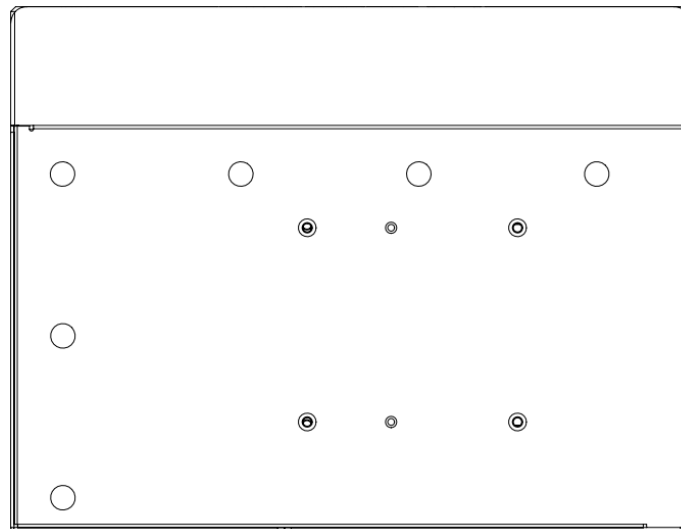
MXC-3340 mechanical dimensions (Rear view)
